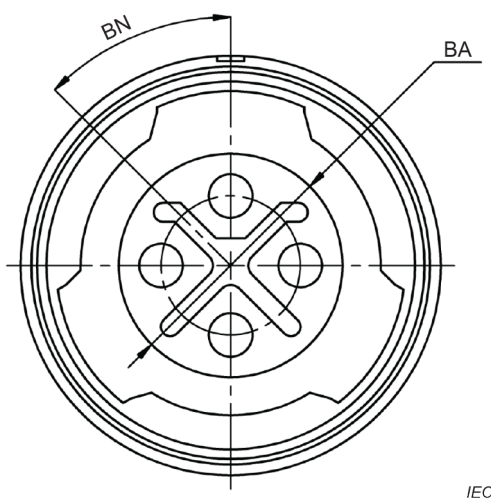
Front view of the female side of the push-pull housing for S-coding
